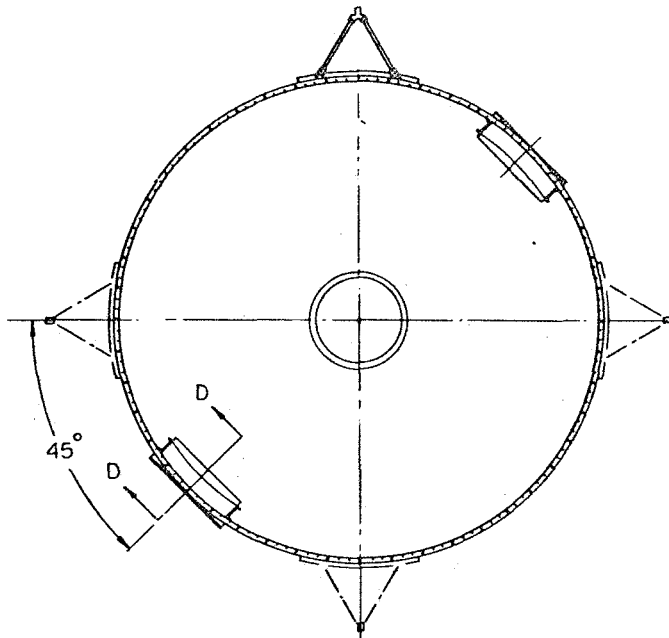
STRUCTURAL DETAILS, MODULAR CONCEPT
